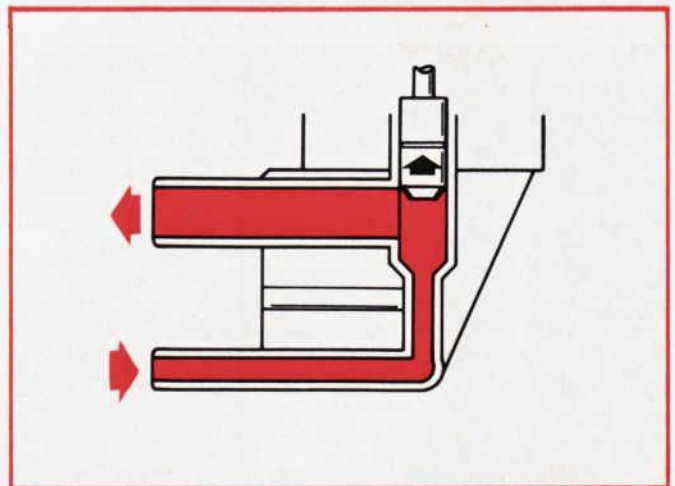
B—Solenoid Valve Open to Carburetor Spark Port
